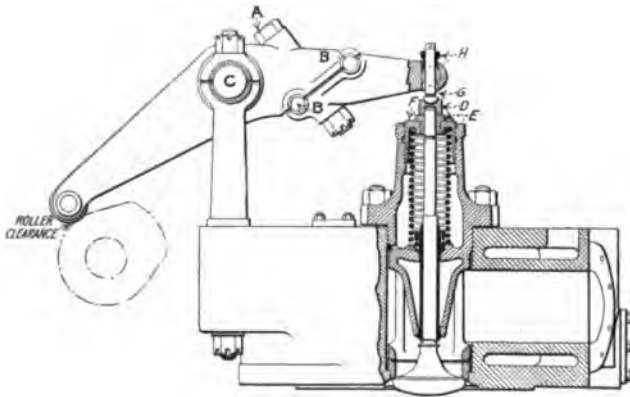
Busch-Sulzer type B Diesel exhaust valve and rocker.
